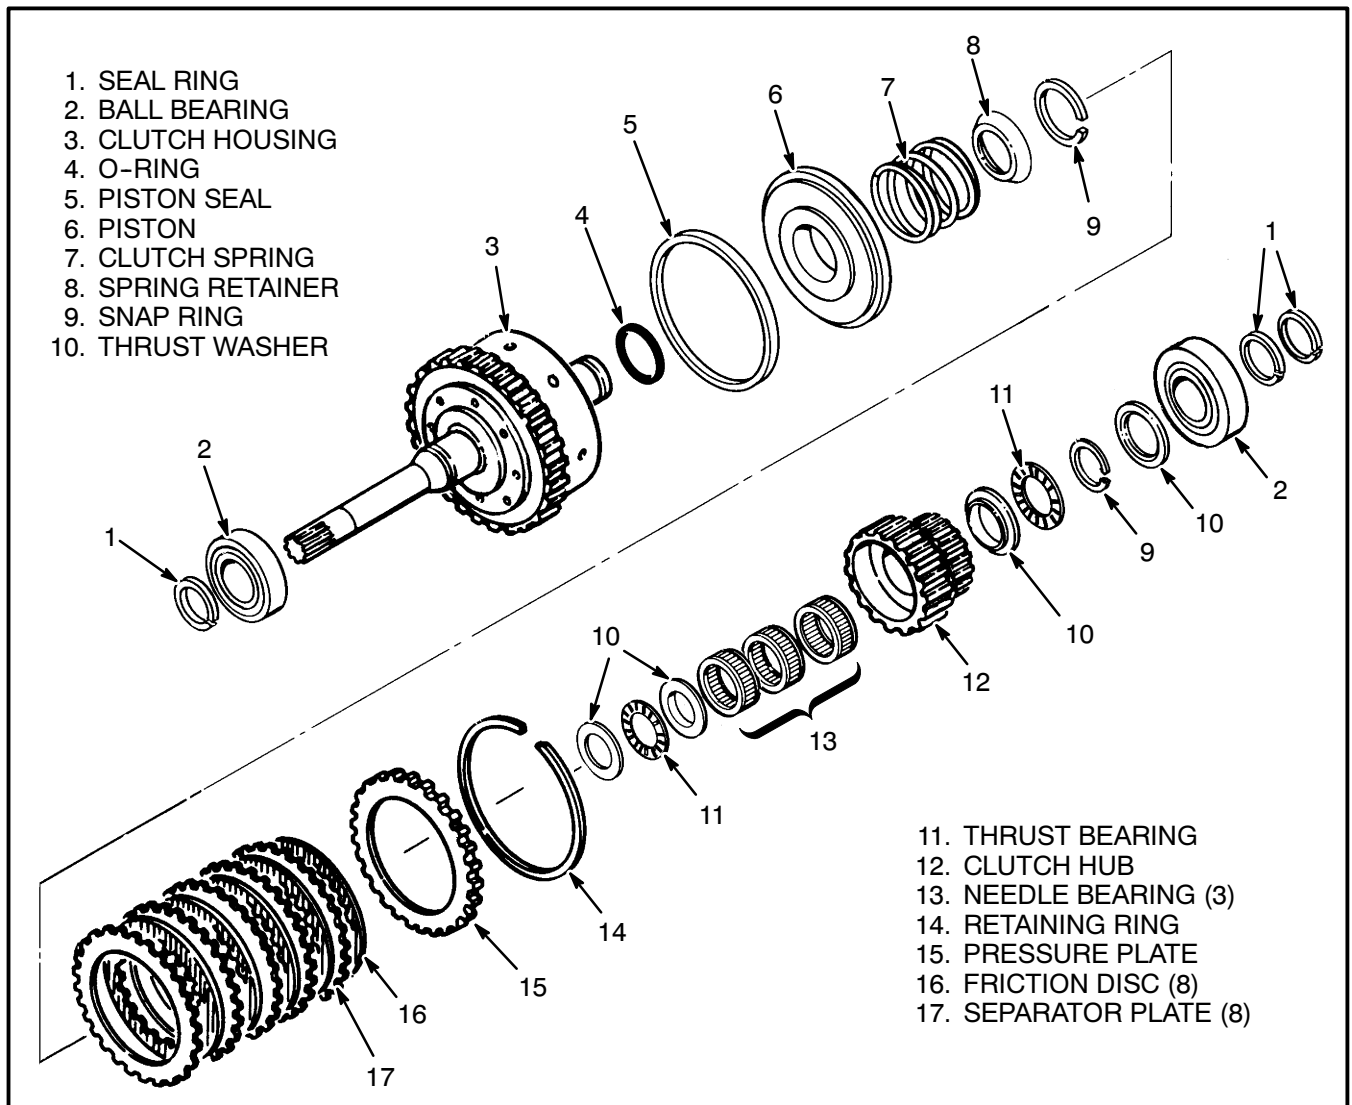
REVERSE CLUTCH ARRANGEMENT
